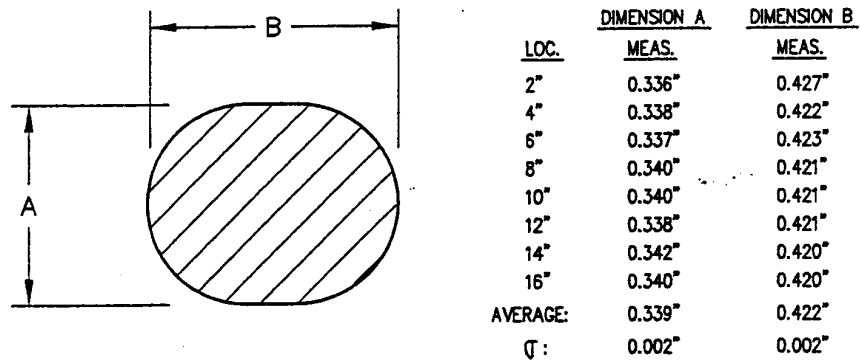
Primary lid elastomer O-ring crushed dimensional configuration.
